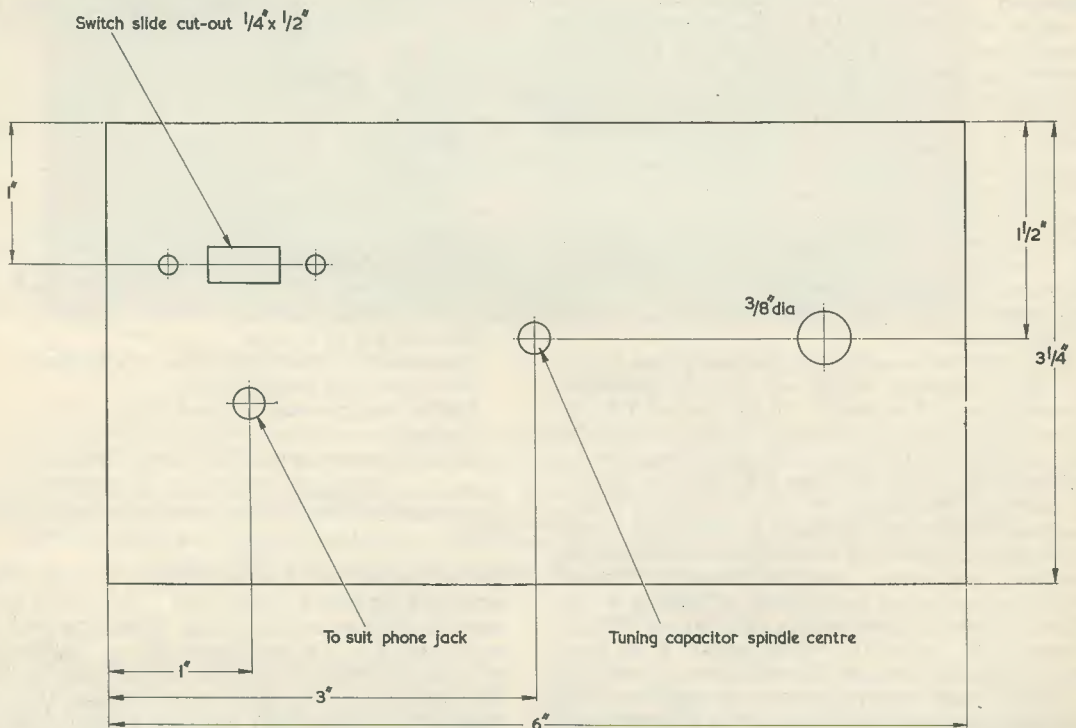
Essential drilling dimensions for the front panel. Extra mounting holes will be required for the tuning drive, and these may be marked out from the drive itself. The dimensions shown for the slide switch may vary with some types, and this point should be checked before drilling and cutting out. The material is $\frac{1}{8}$ in polished Paxolin
